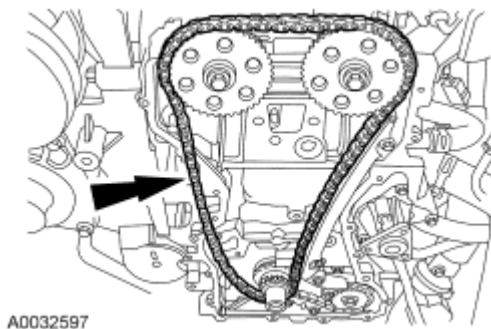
Locating Timing Chain Tensioner & Bolts
